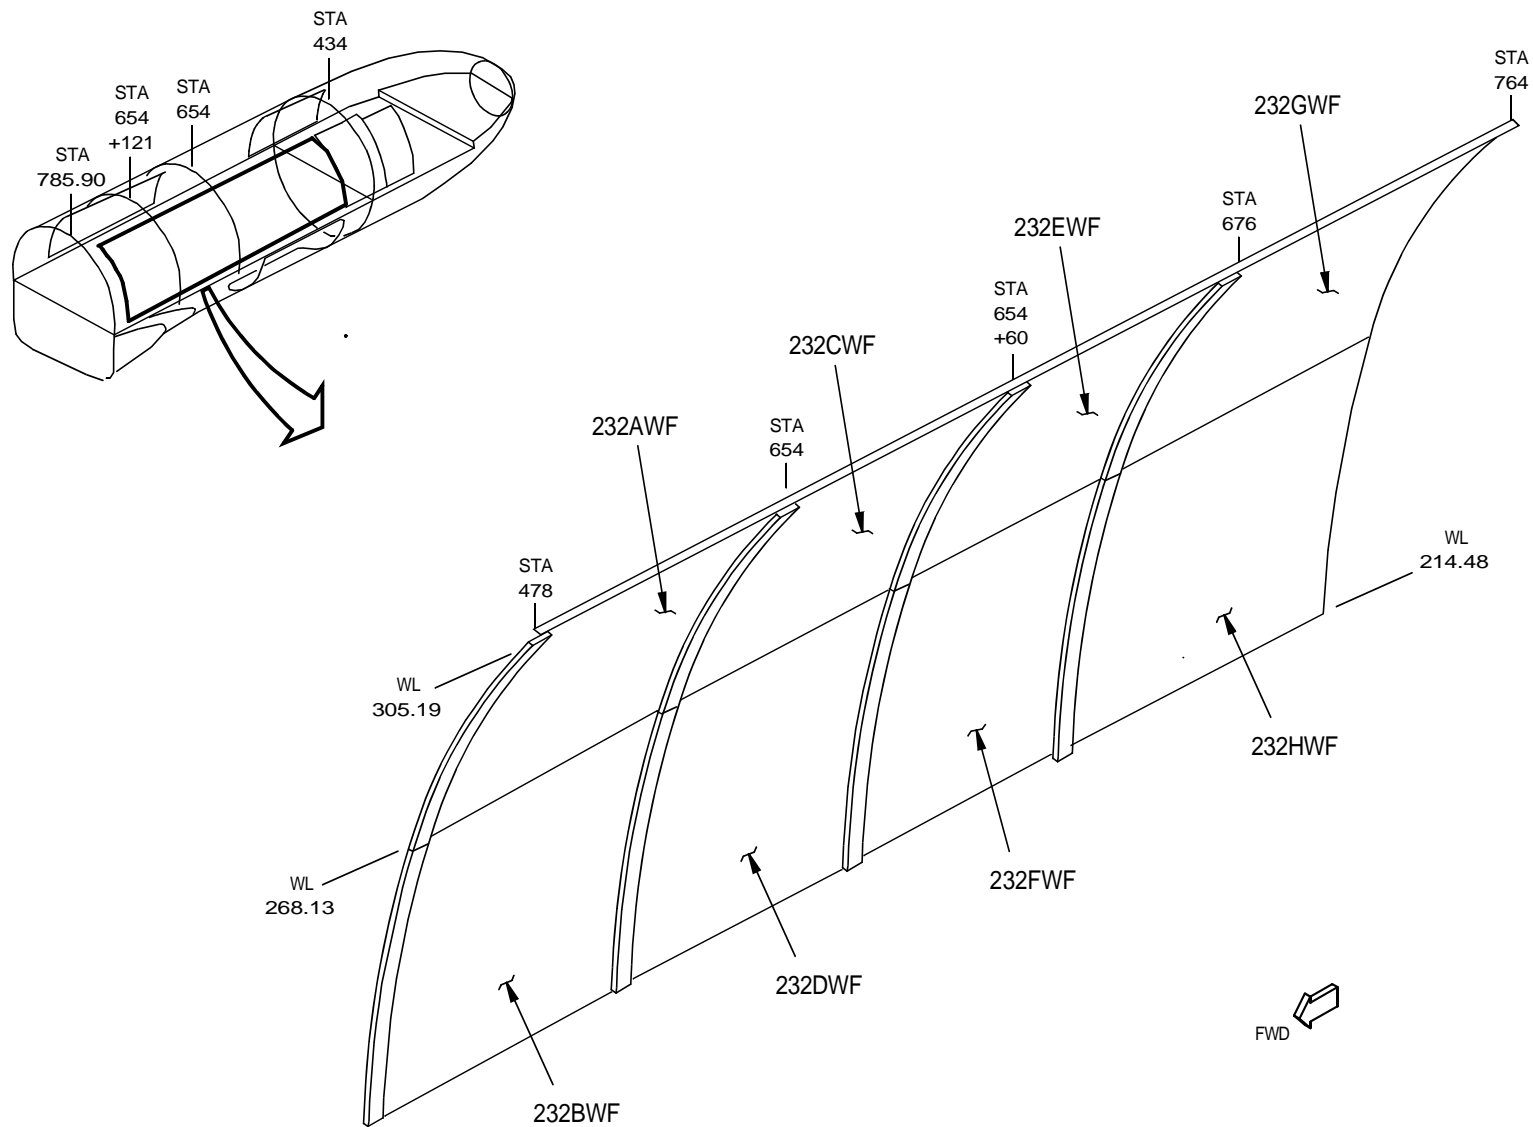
SUB-MAJOR ZONE 232 MAIN DECK SIDEWALL PANELS - FREIGHTER - RIGHT
